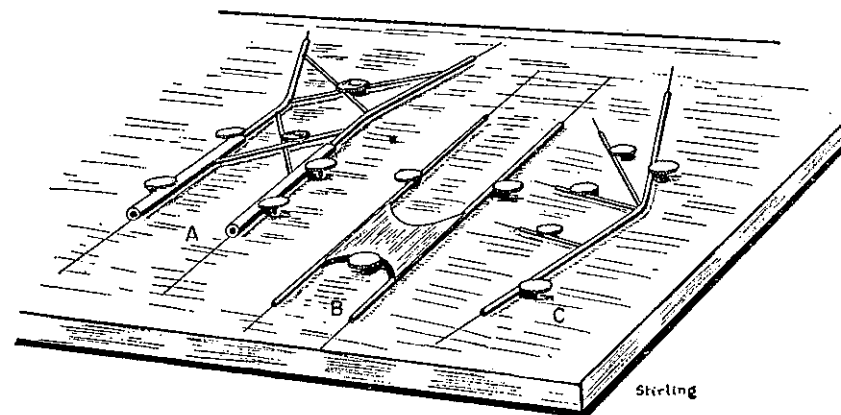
Building up an undercarriage on a block of wood. Drawing pins serve to locate parts until soldering is completed.
